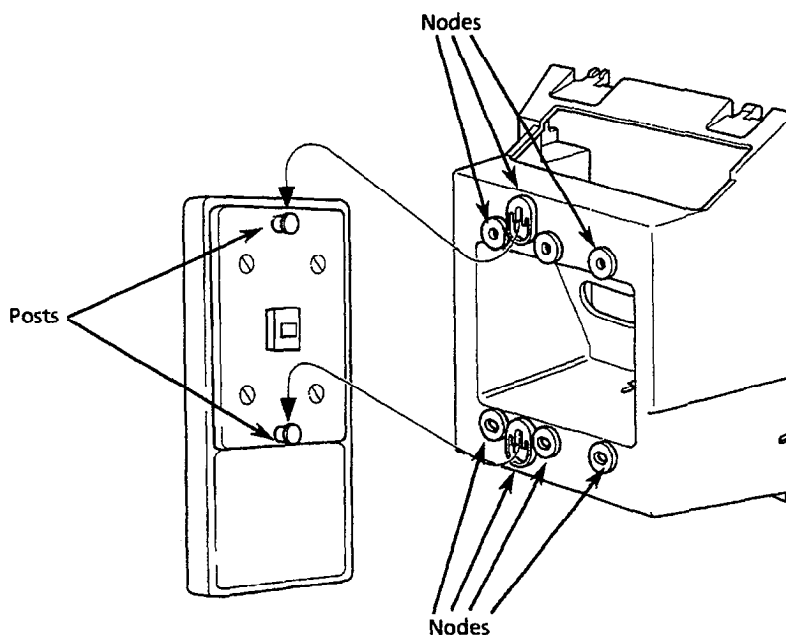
Attaching the Wall Mount Unit to the Wall
